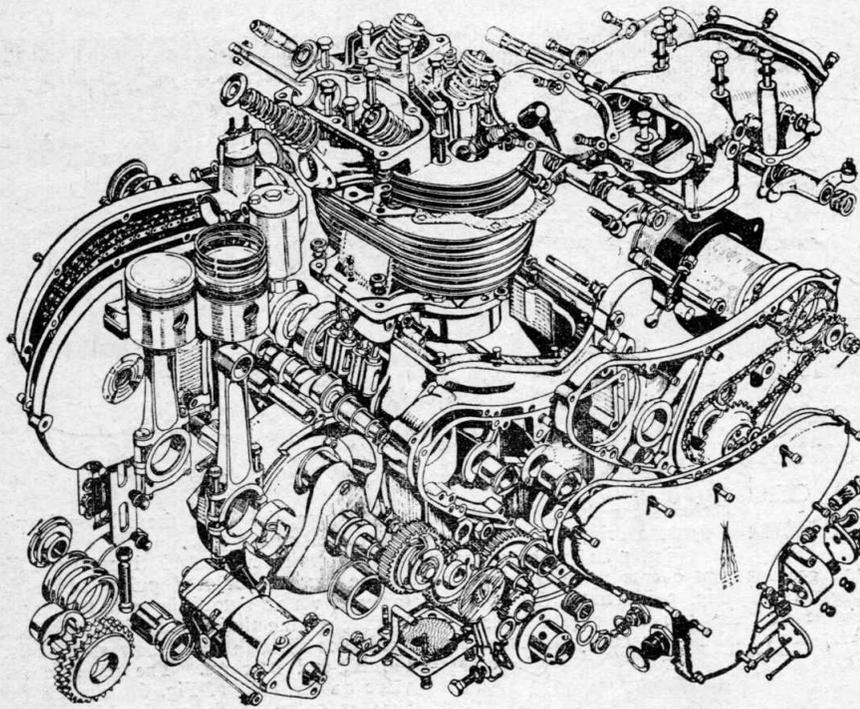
Details of 650 c.c. engine and 500 c.c. engine after engine No. AA7-101.
